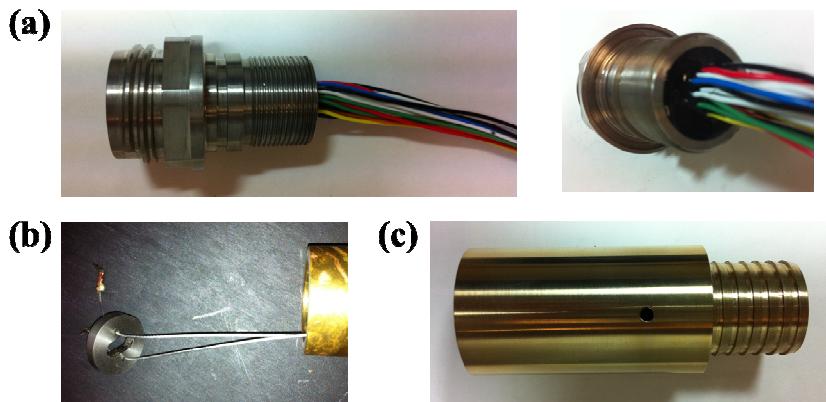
Connector assembly components for the inline array, including (a) Teledyne Impulse MHDM-BCR bulkhead connectors with molded hook-up wires, (b) tension disk that fits inside the adapter with tension cables, and (c) Adapt-o-matic custom adaptor.
